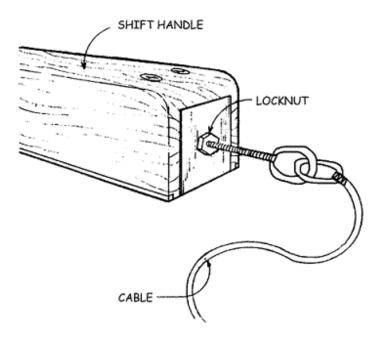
Shift-Handle-to-Drop-Box Cable Attachment
